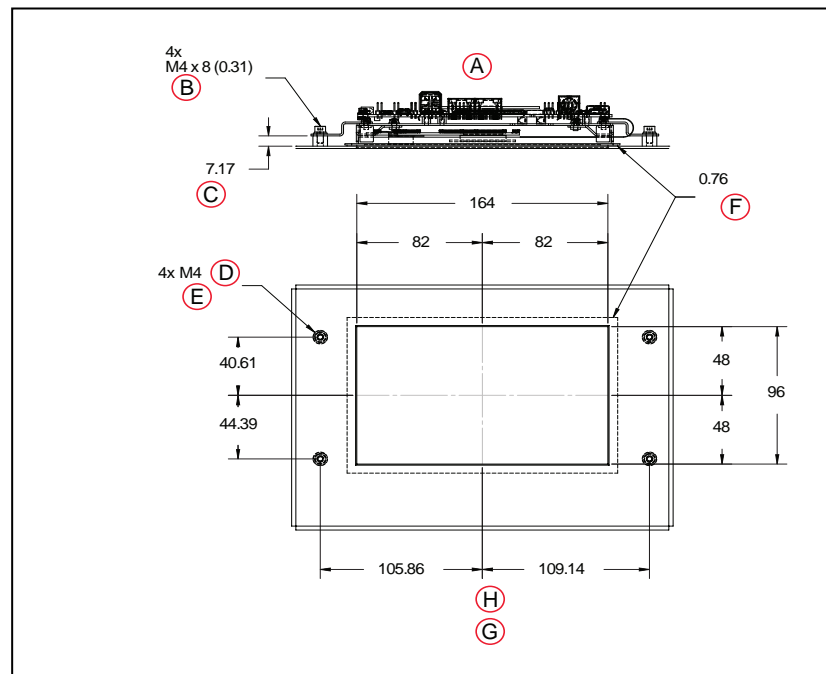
Standoffs/Spacers for Mounting the touchscreen (Welded Shown) (units are mm)
